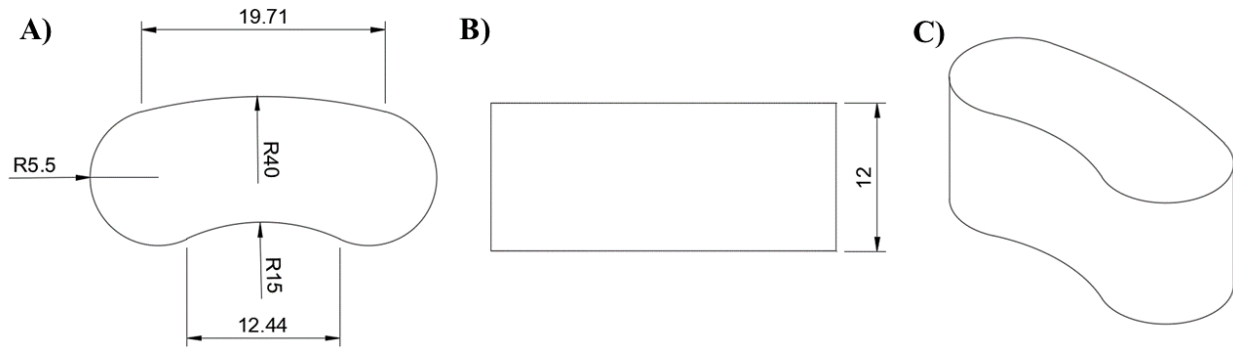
Kidney-shaped lumbar interbody fusion cage. (A) Top view, (B) Front view and (C) Isometric view. Dimensions in mm.
